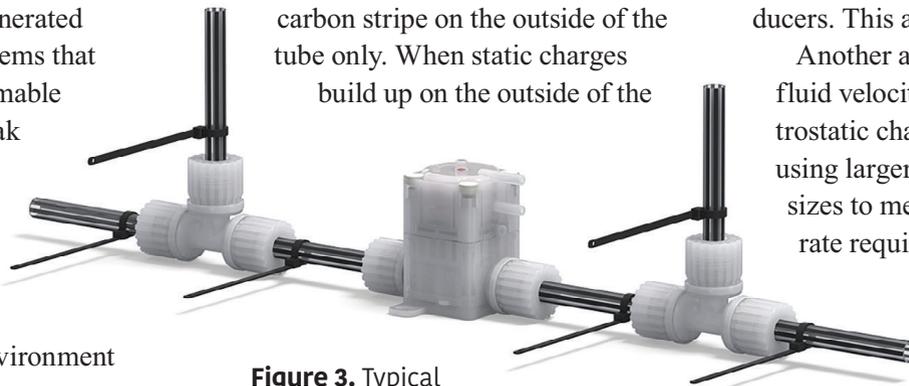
Typical fluid assembly with discontinuous charge dissipation path across components.
